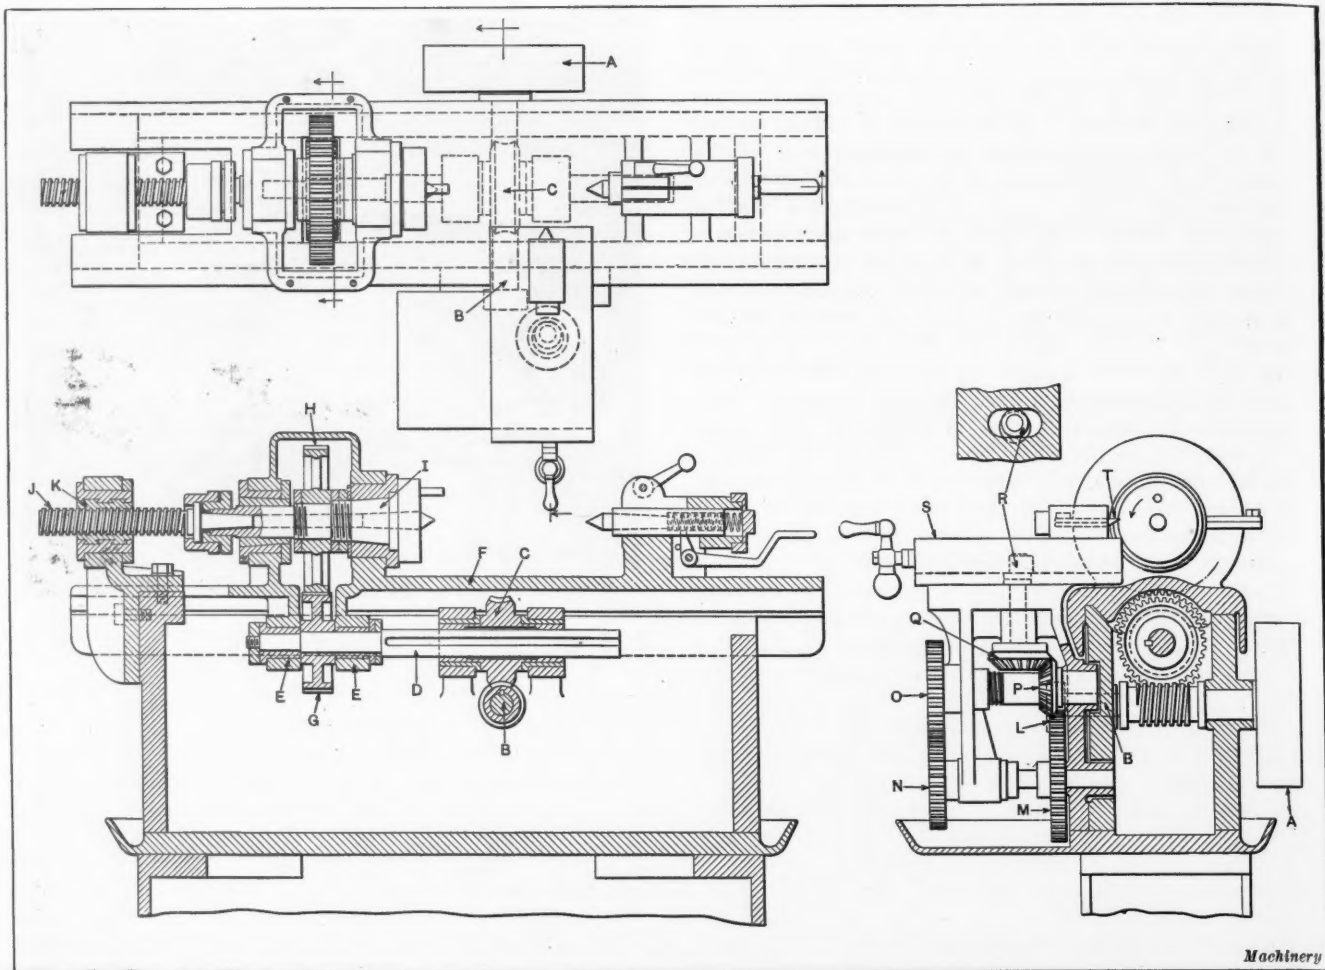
Plan, Front, and End Views of Hob-grinding Machine, showing Arrangement of Driving and Feed Mechanism
